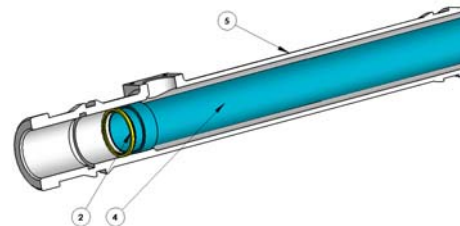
Schematic representation of the elastic safety lock mounting inside of end fitting
